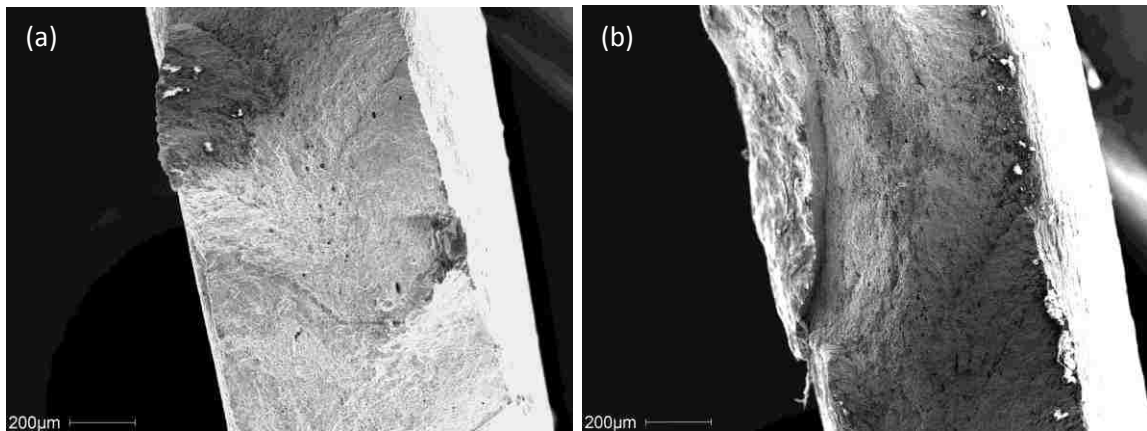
(a) DP600 and (b) DP780 tube fracture surfaces
